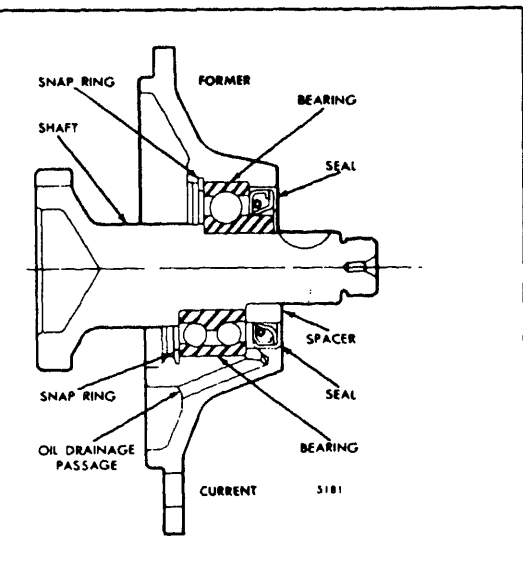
Former and Current Drive Plate Type Accessory Drive
